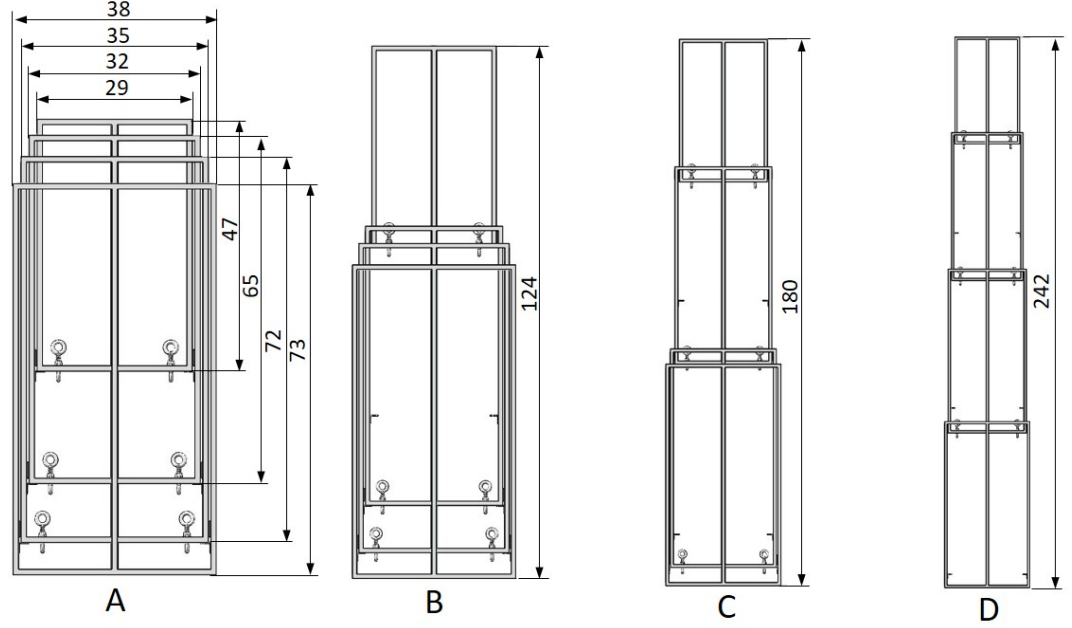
Dimension for drop tower (unit: inch): A.Sizes for four boxes; B.Height of tower when the first box was raised; C.Height of tower when the second box was raised; D.Height of tower when the third box was raised;
